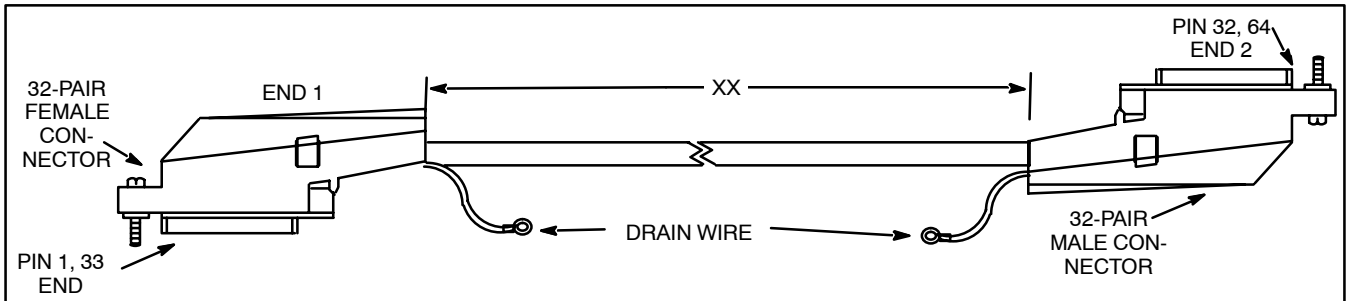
Shelf Connecting Cable Stub Assembly — 03-2973XX-0
